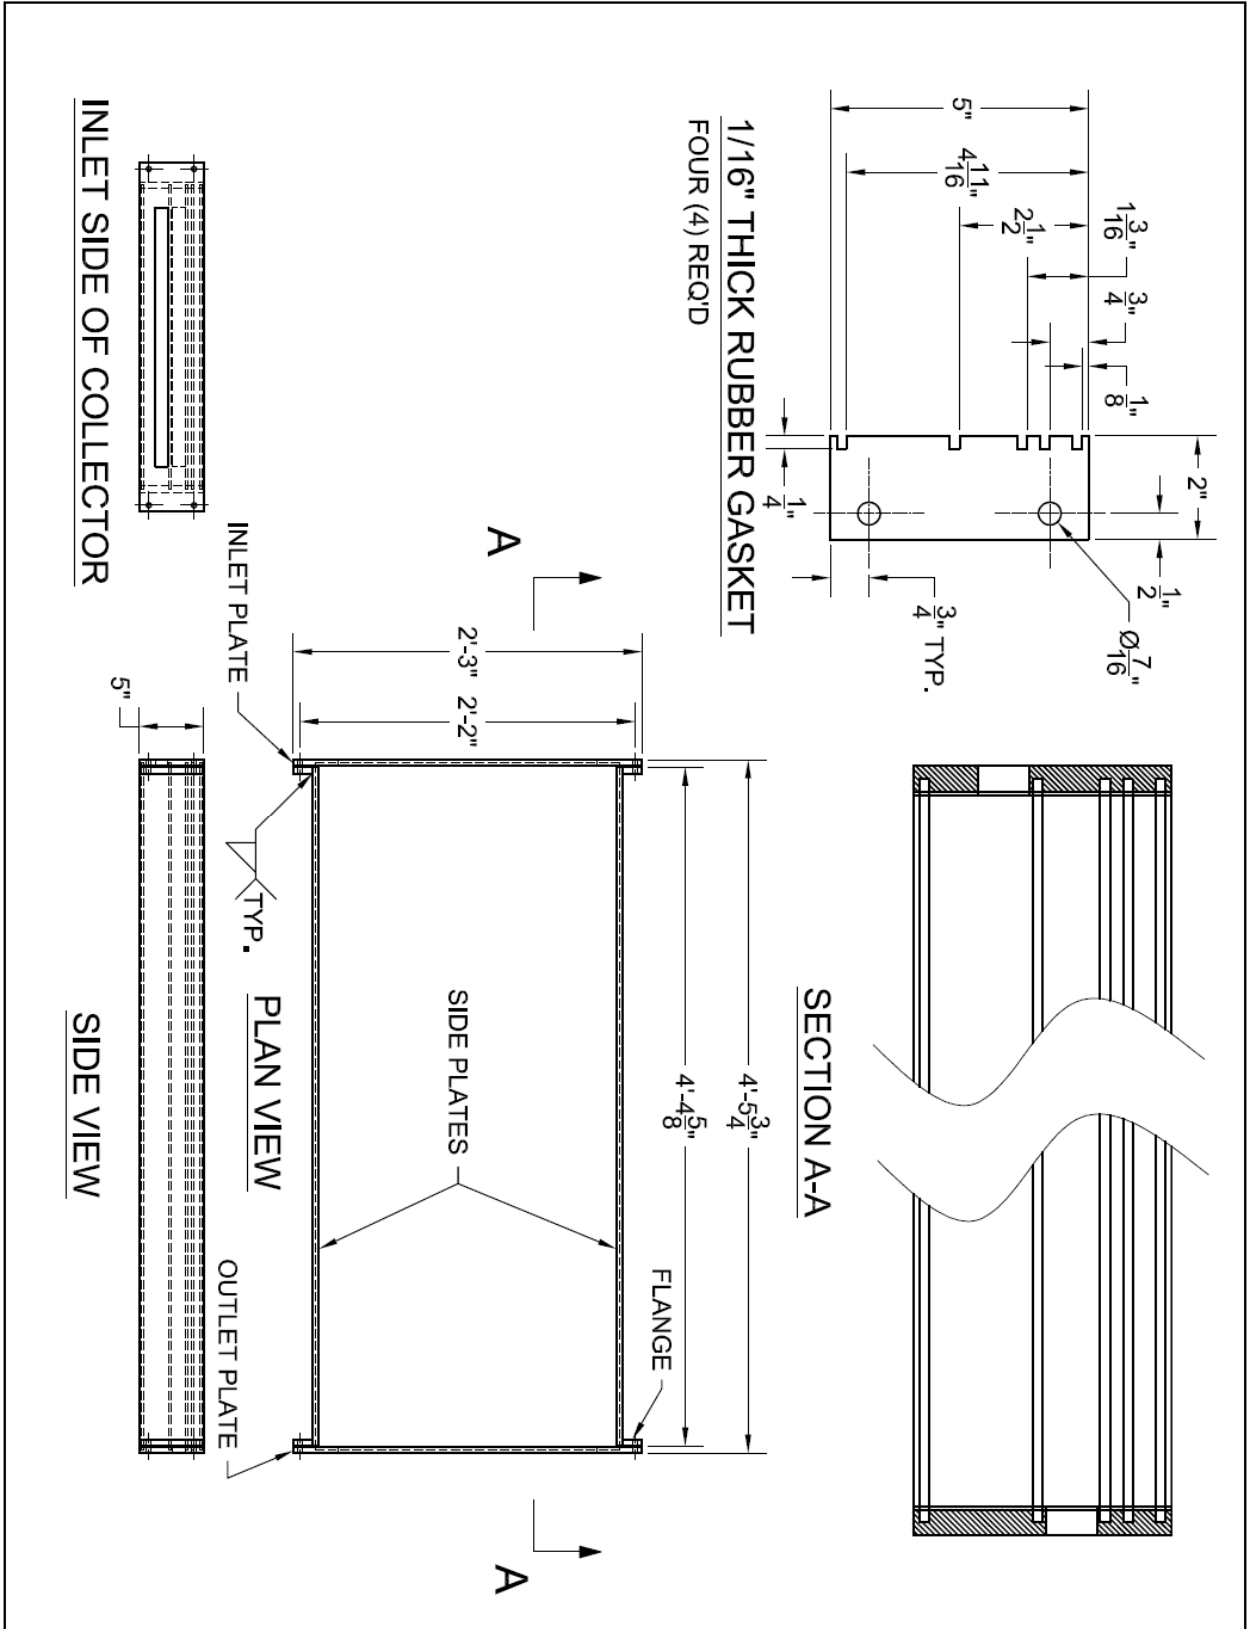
COLLECTOR FRAME GENERAL ASSEMBLY DRAWING
